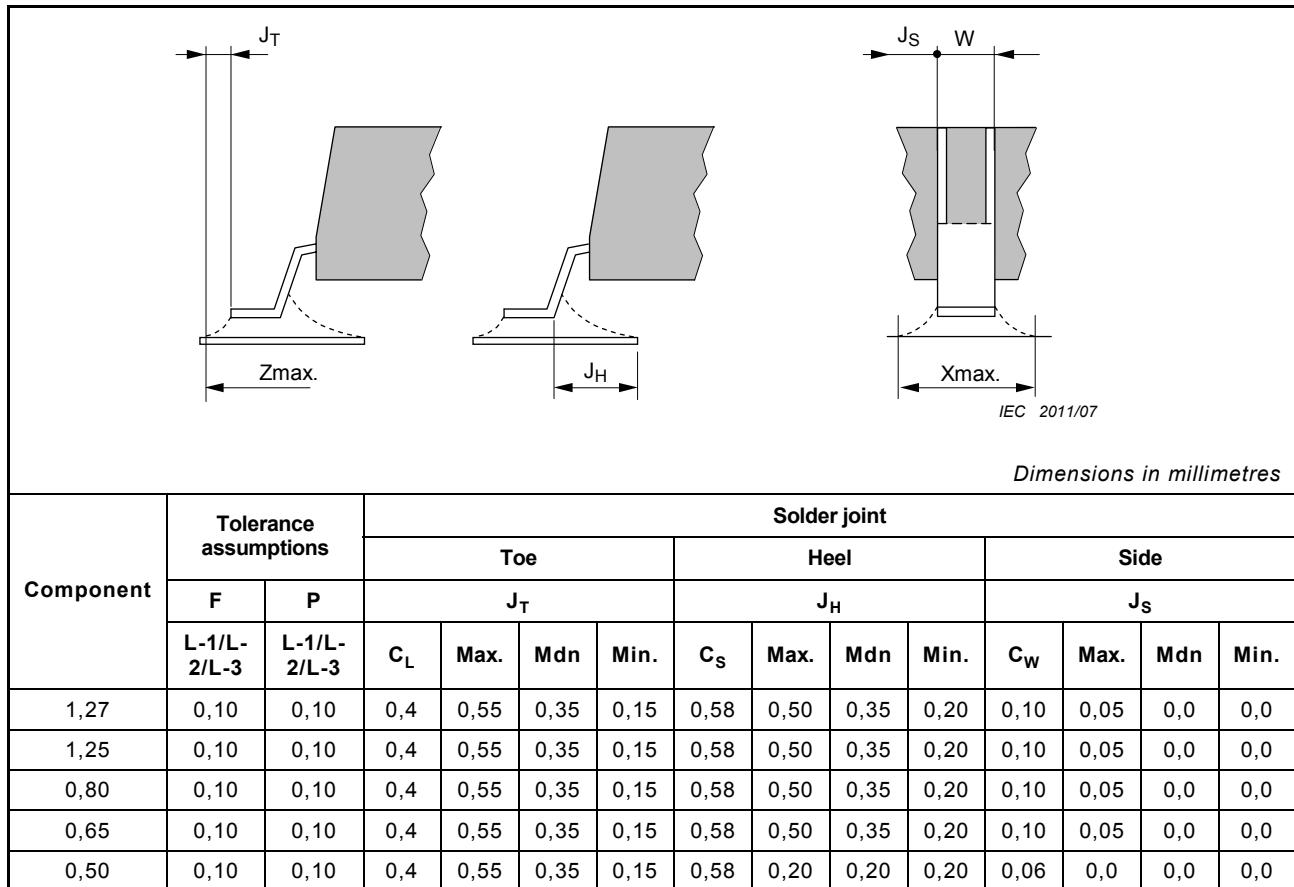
Solder joint fillet design (see IEC 61188-5-1, Tables 2 and 3)
